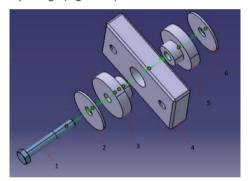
3D model of engine carriers. 1-bolt; 2-lower washer; 3-lower part of rubber vibration reducer; 4-metal truss; 5-upper part of rubber vibration reducer; 6-upper washer
